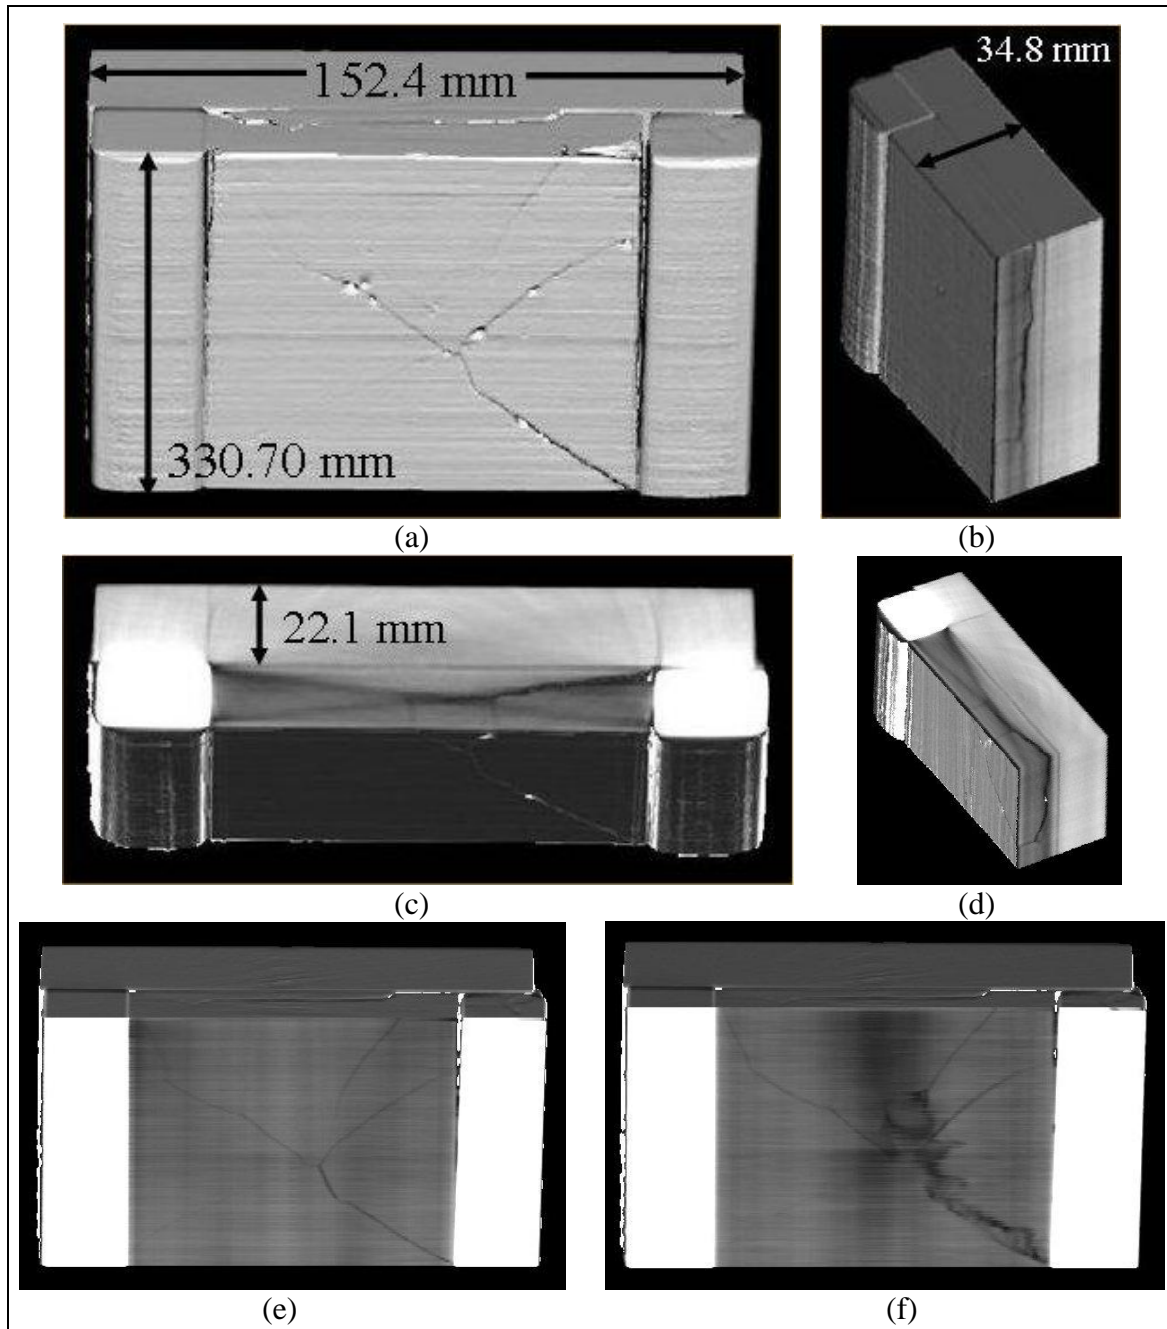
A series of 3-D solid visualization images of specimen 2: (a) entire specimen with the front tilted forward, (b) section removed perpendicular to thickness, (c) section removed perpendicular to height, (d) sections removed perpendicular to both thickness and height, (e) section removed parallel to the faces showing the majority of thickness of the tile, and (f) section removed parallel to the faces showing about half the thickness of the tile.
